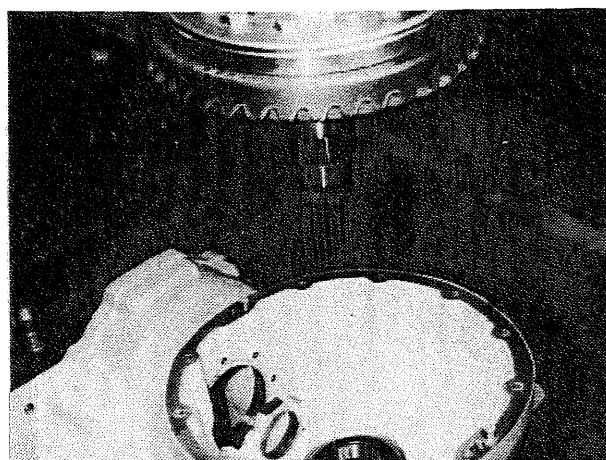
Ring Gear, Pinion & Drum Shaft (2 of 5)
